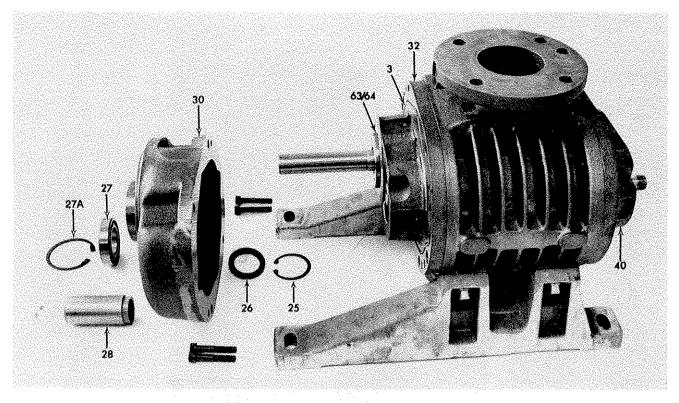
Removing and Disassembling the Intermediate Flange (WA-250 pump model shown). 18-7.36
